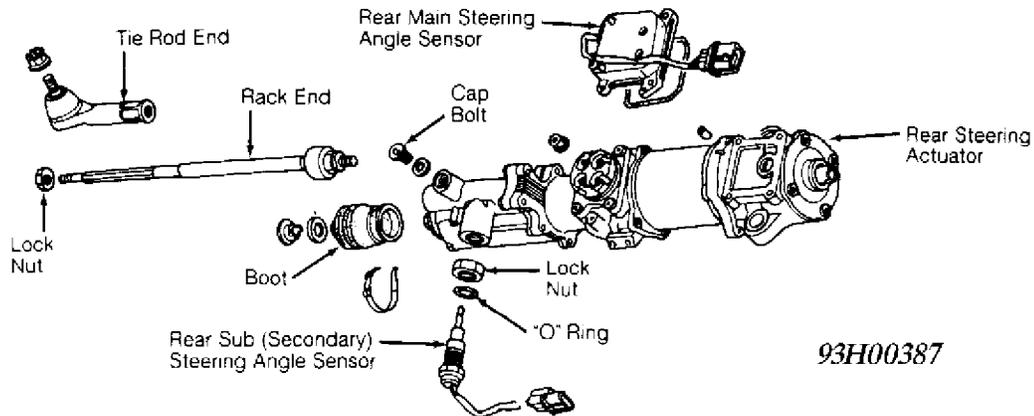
Exploded View Of Rear Steering Actuator Assembly
